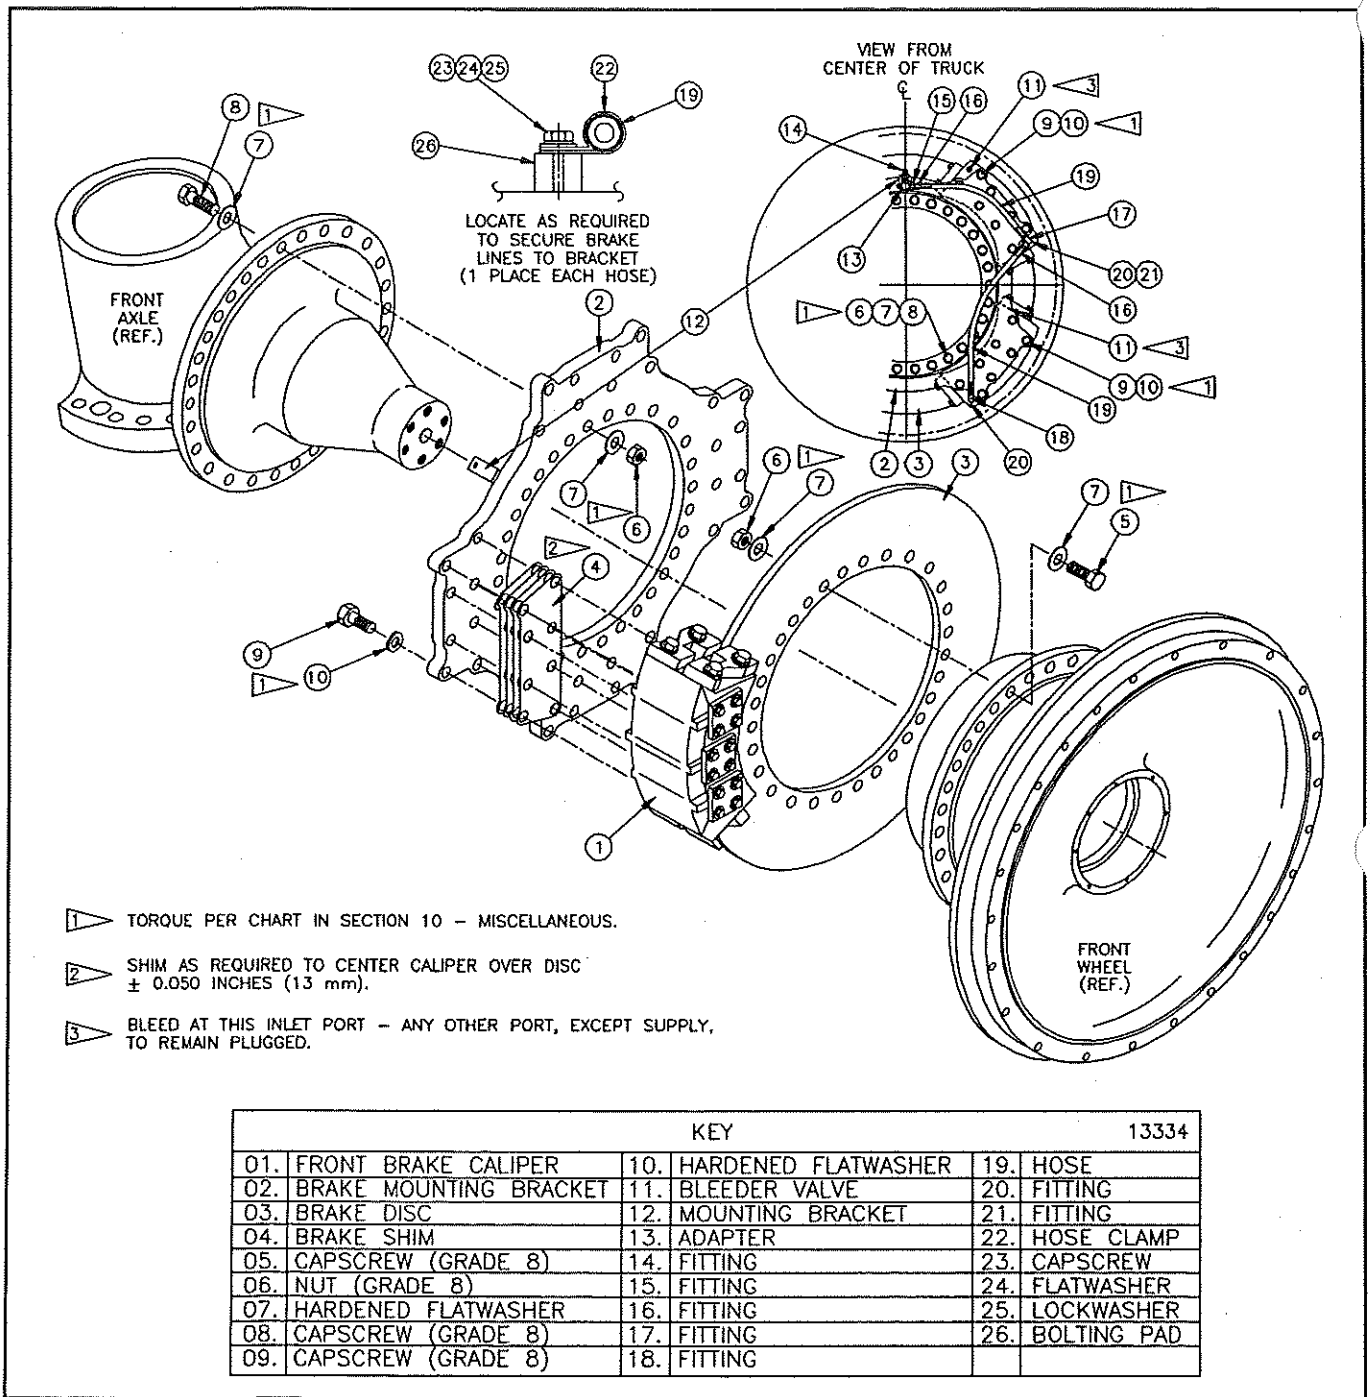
TYPICAL QUAD FRONT CALIPER ASSEMBLY - MT 4000
